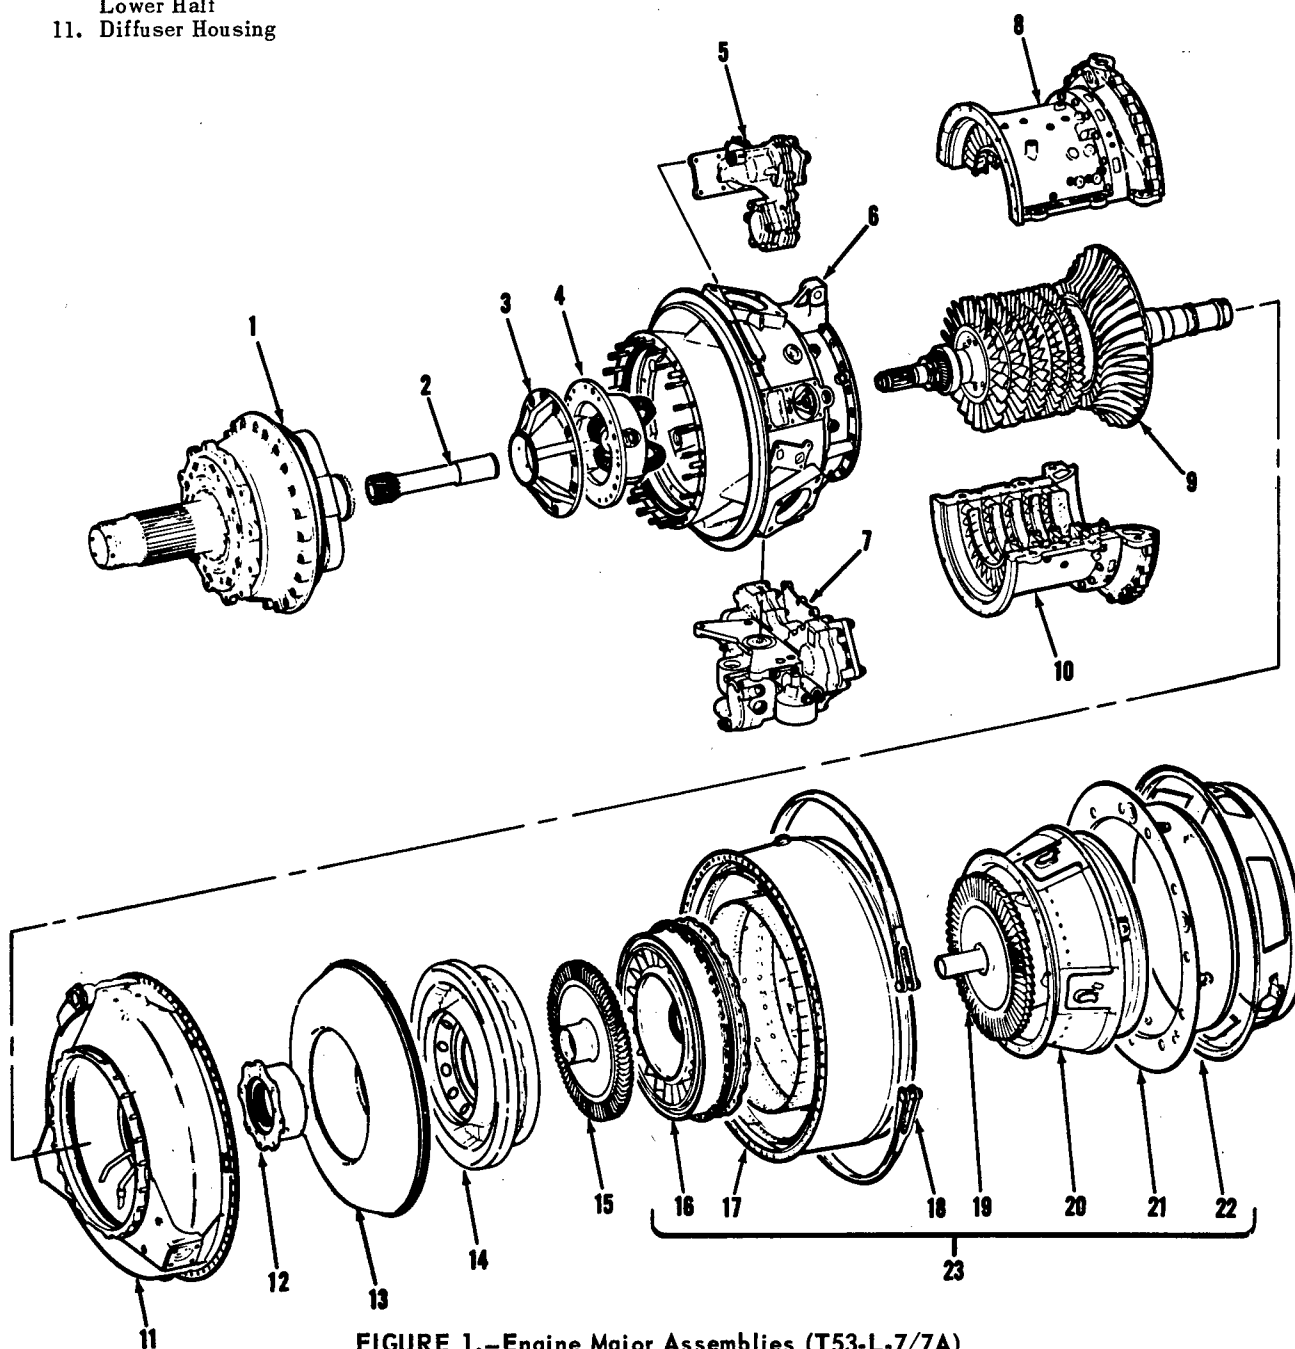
Engine Major Assemblies (T53-L-7/7A)
